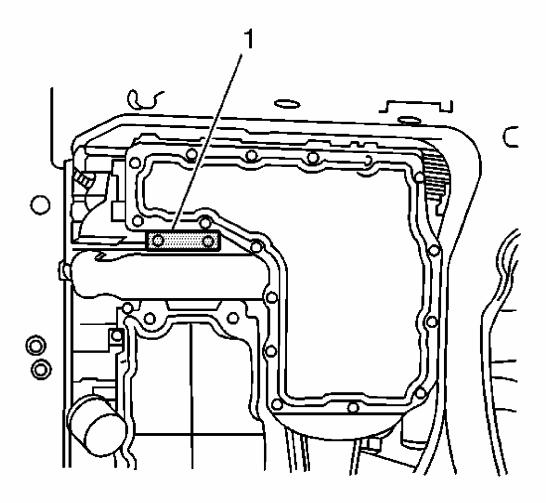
Locating Flywheel Holder J 44214 Courtesy of GENERAL MOTORS CORP.
